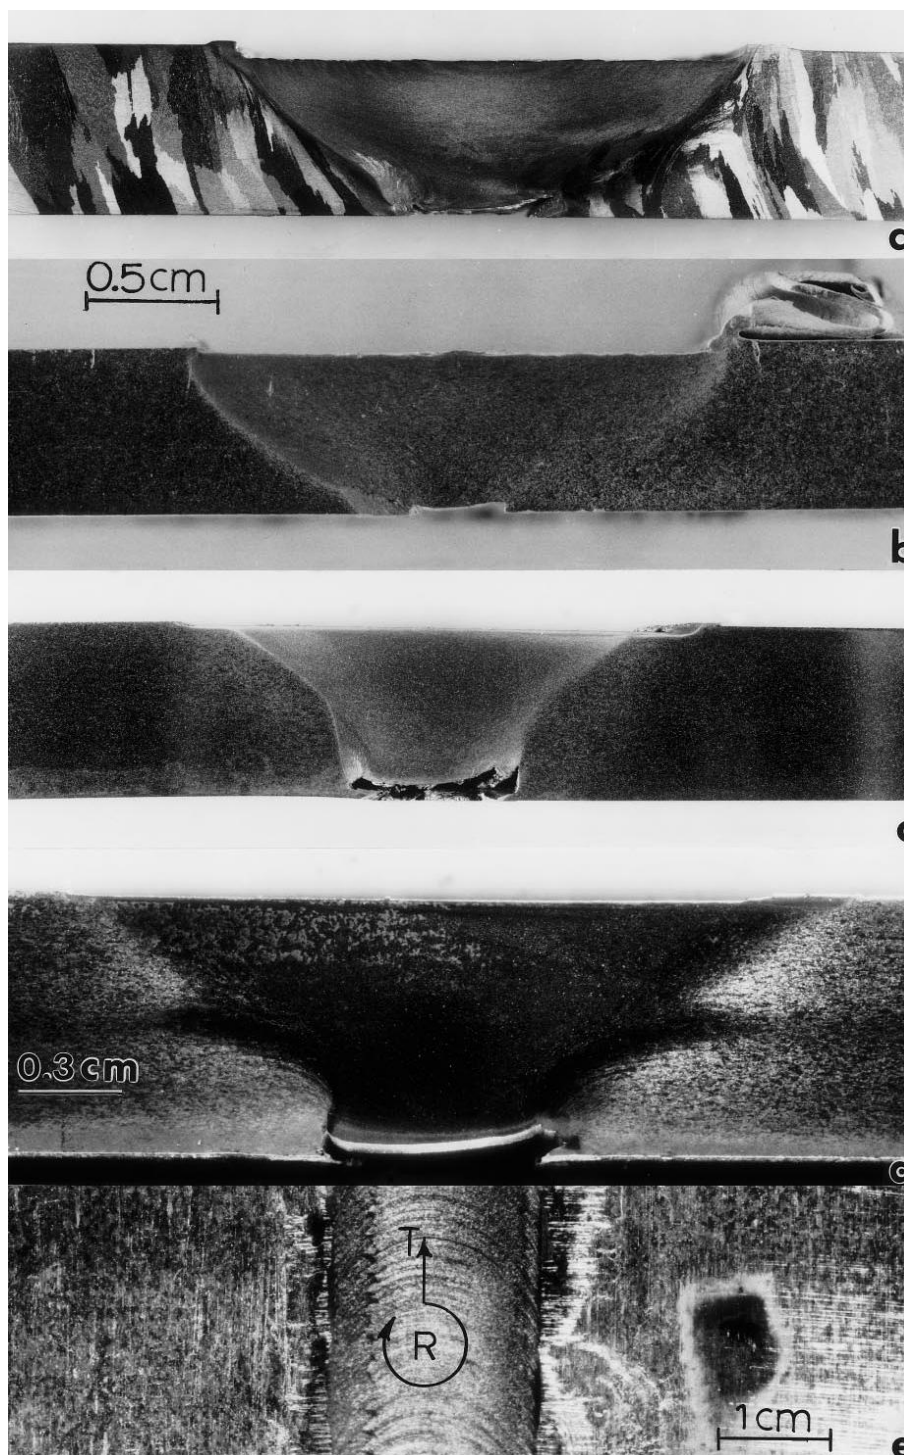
a–e Examples of weld zone cross sections in FSW aluminum alloy work pieces. a) Columnar-grained (cast) 1100 aluminum ($R=400$ rpm; $T=1$ mm/s), b) Modified 1100 aluminum ($R=400$ rpm; $T=2$ mm/s), c) 6061-T6 aluminum ($R=300$ rpm; $T=0.5$ mm/s), d) 6061-T6 aluminum ($R=400$ rpm; $T=2$ mm/s), e) Upper surface view for d. (Magnification is the same in a, b and c) (Murr et al., 1998).
